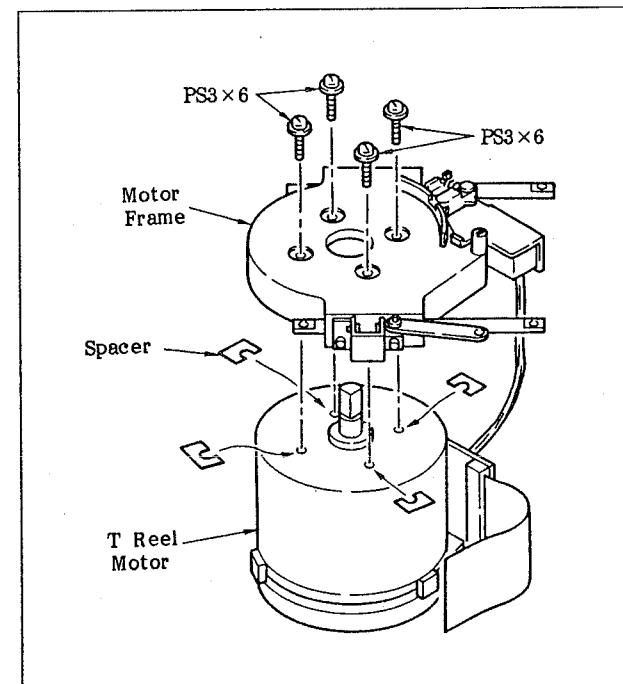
Correcting the Deviation of the Reel Motor Shaft (2)
